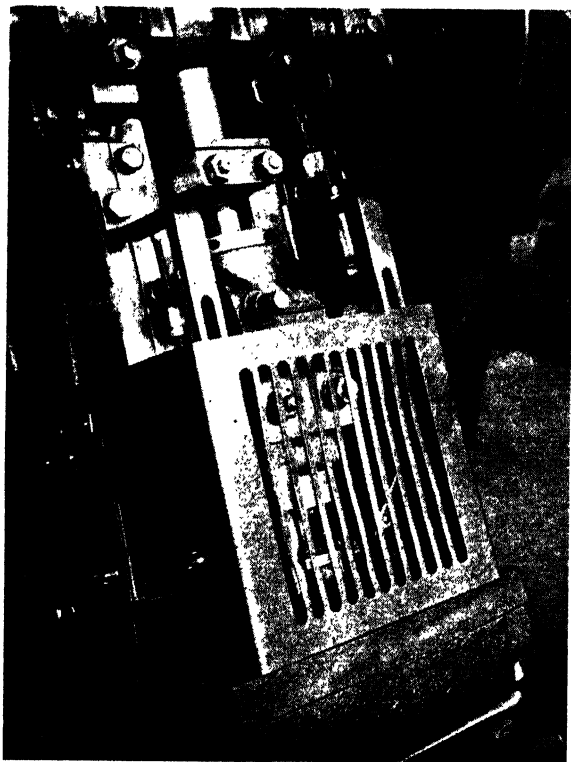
GUARD FOR SMALL BLANKING STRIP PRESS
